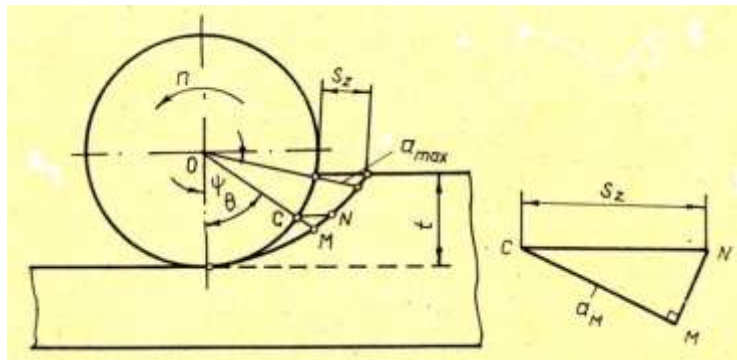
Cutting thickness when milling with a cylindrical milling cutter.
